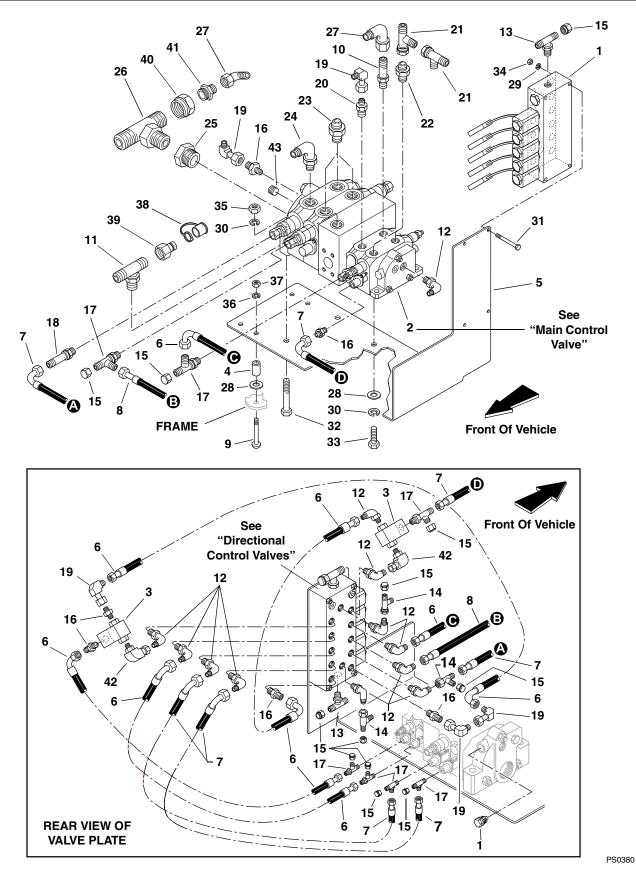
Valve plate assembly (without auxiliary hydraulics).
